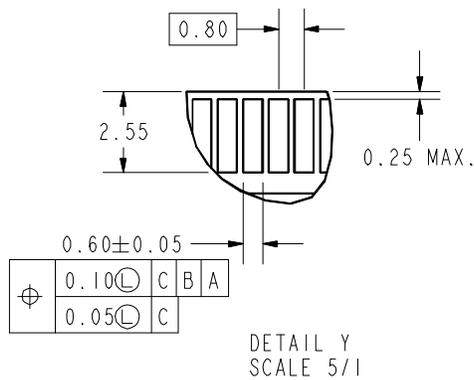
SO-DIMM Mechanical Drawing (4 of 5)
